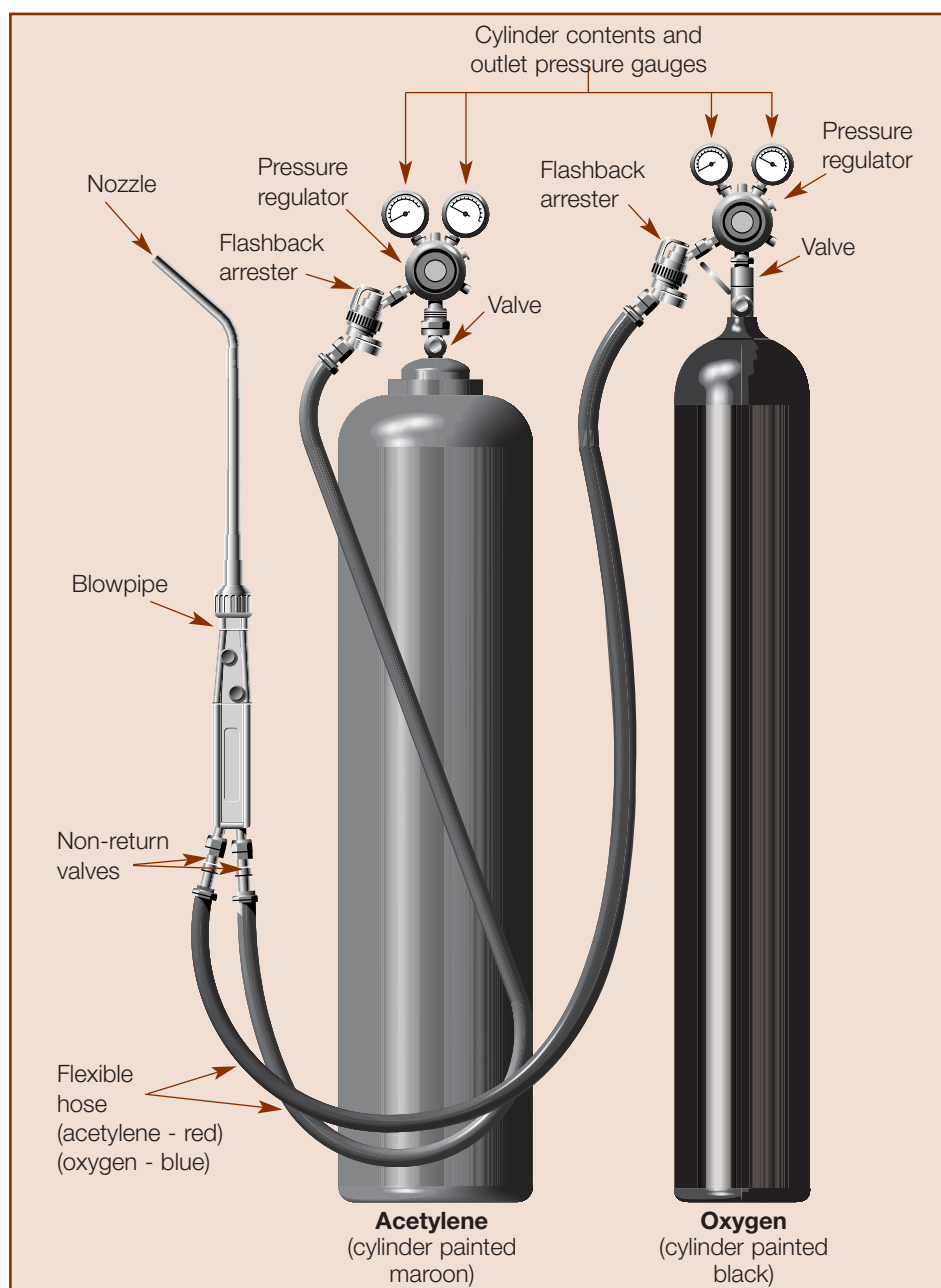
Typical equipment used in oxy/acetylene gas welding and similar processes
